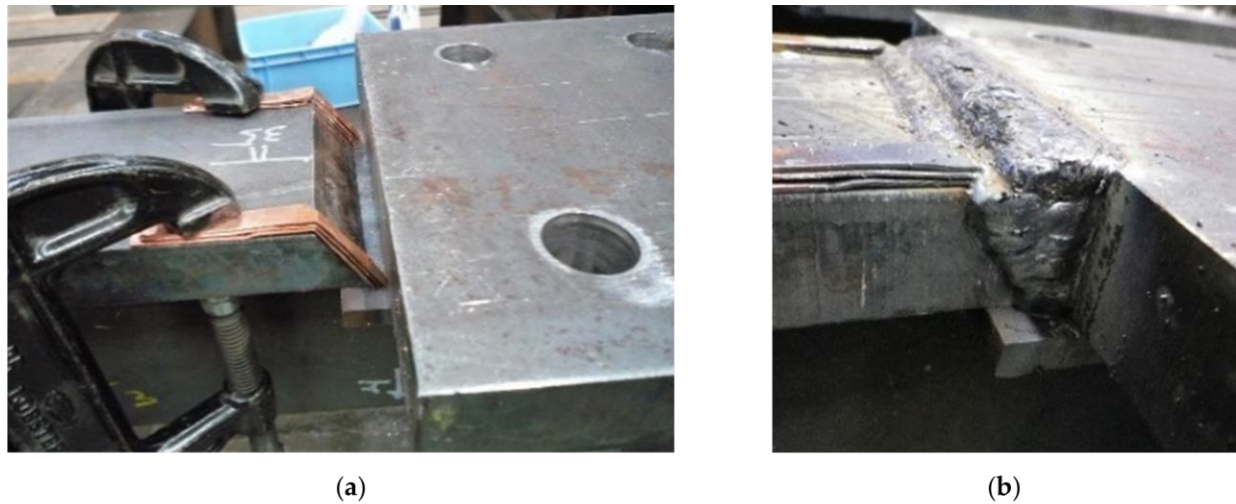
Copper plate insertion of the FTC specimen: (a) before and (b) after welding.
